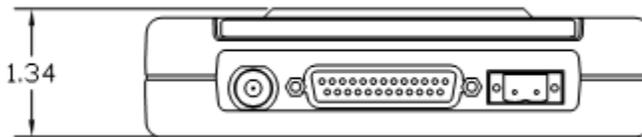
entraNET 220 Packaged Radio Module (Front View)
